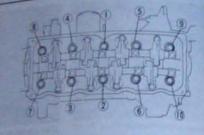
Cylinder head bolt tightening sequence (Sec 22)
